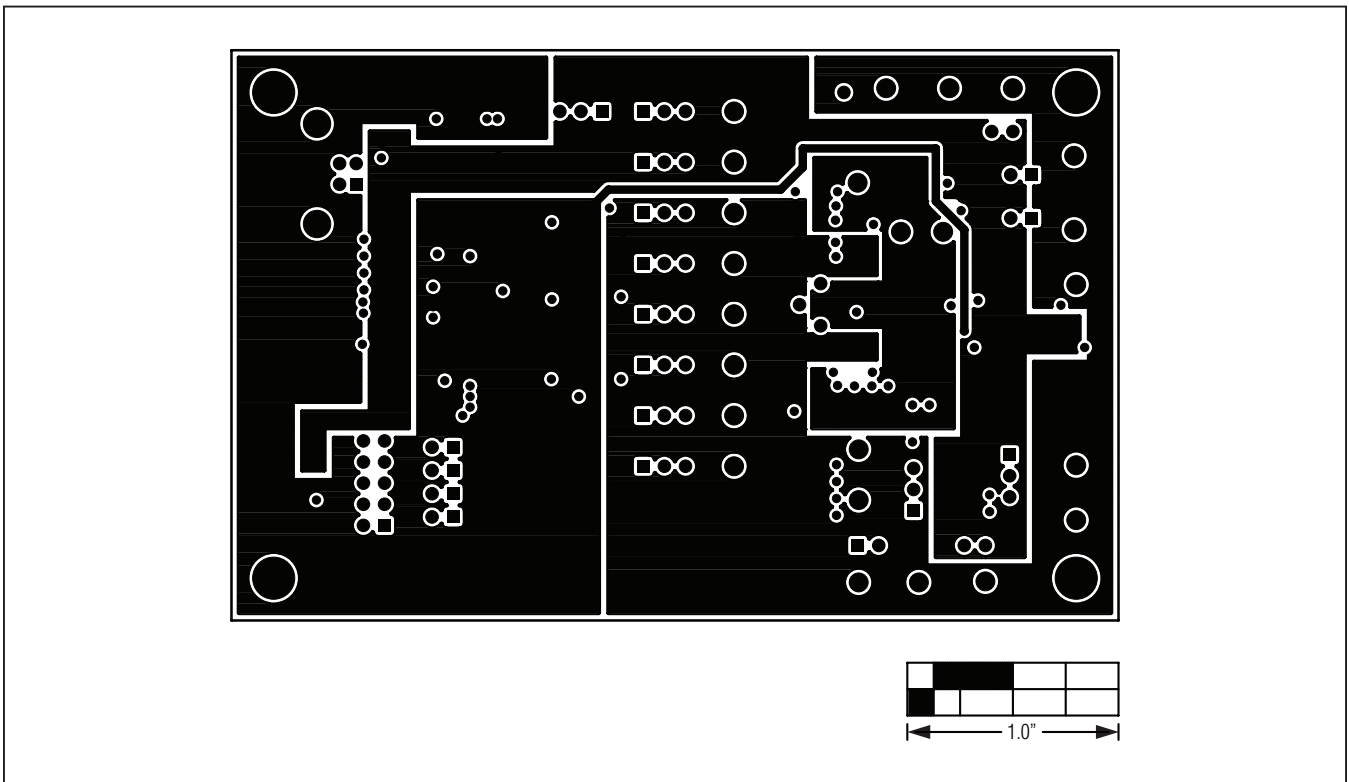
MAX544X EV Kit PCB Layout—Power Layer 3
